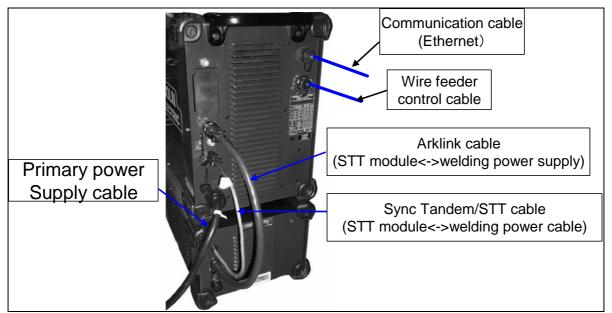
(u) Connection of ROBOWELD iC/H3 (Power Wave R350) and STT module (3/3)
